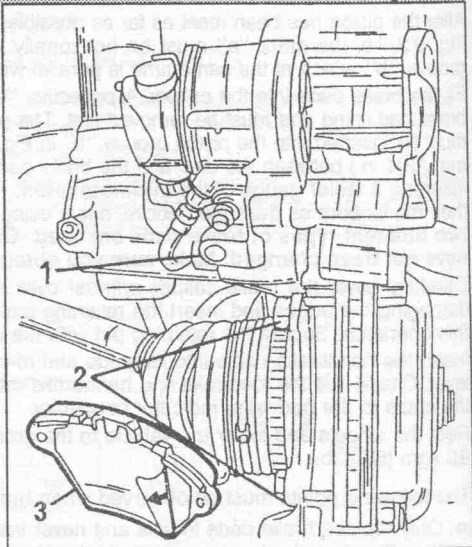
View of a front brake assembly. The caliper is swivelled up on the guide pin (1). The caliper bracket is secured by bolts (2). Note how the protection of the brake pad (3) is peeled off.
